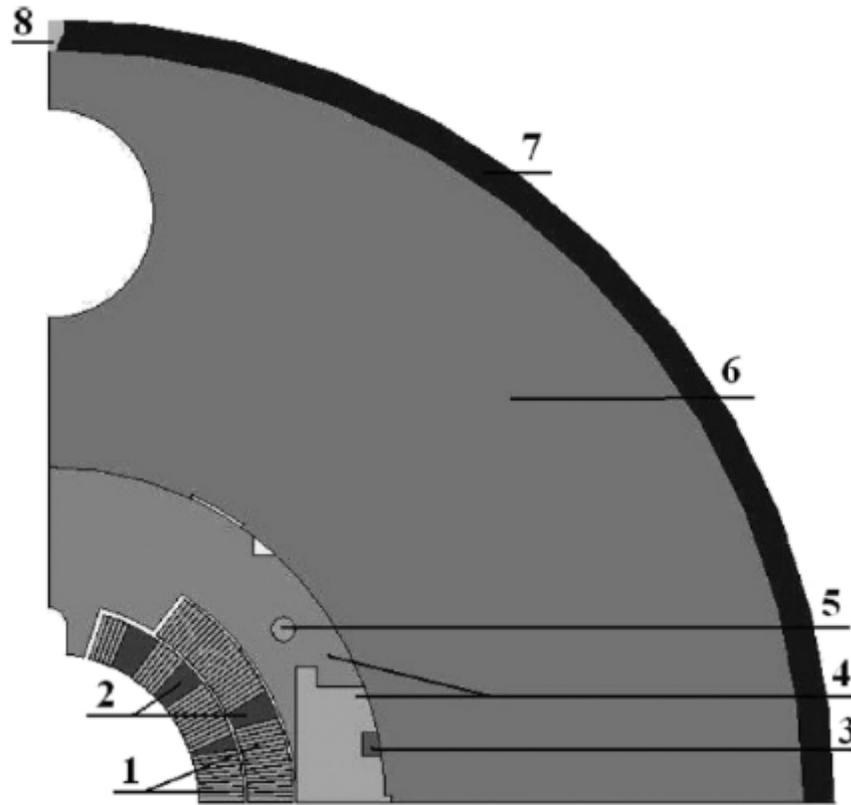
Cross-section of the dipole (one quadrant is shown). 1-coil, 2-inter-turn spacers (wedges), 3-key, 4-collars, 5-pin, 6-yoke, 7-outer cylinder, 8-weld.
